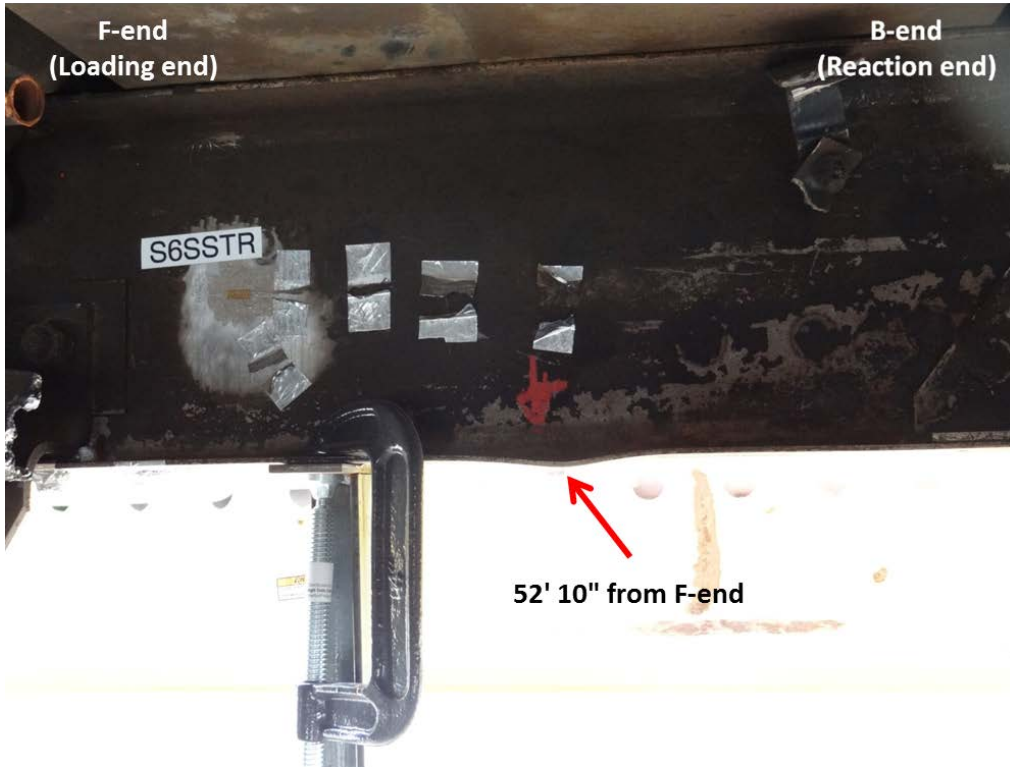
Post-test — Right Side Sill Buckle at Section 6
